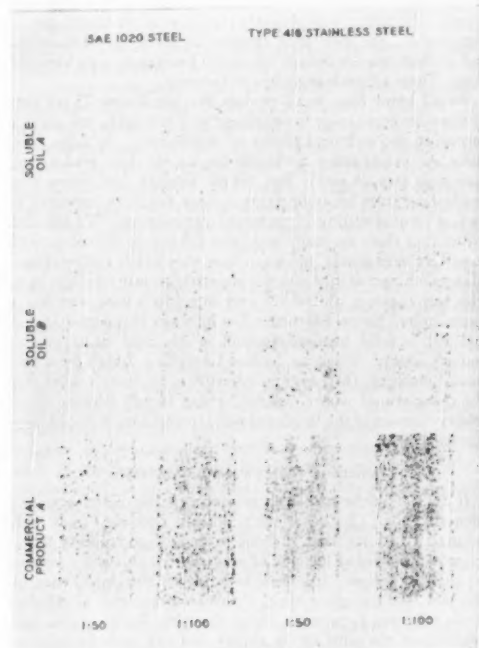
SPOT IMPRESSIONS REPRESENTING METALLIC LOADING WITH VARIOUS GRINDING FLUIDS USING AN A80M5VBE GRINDING WHEEL
